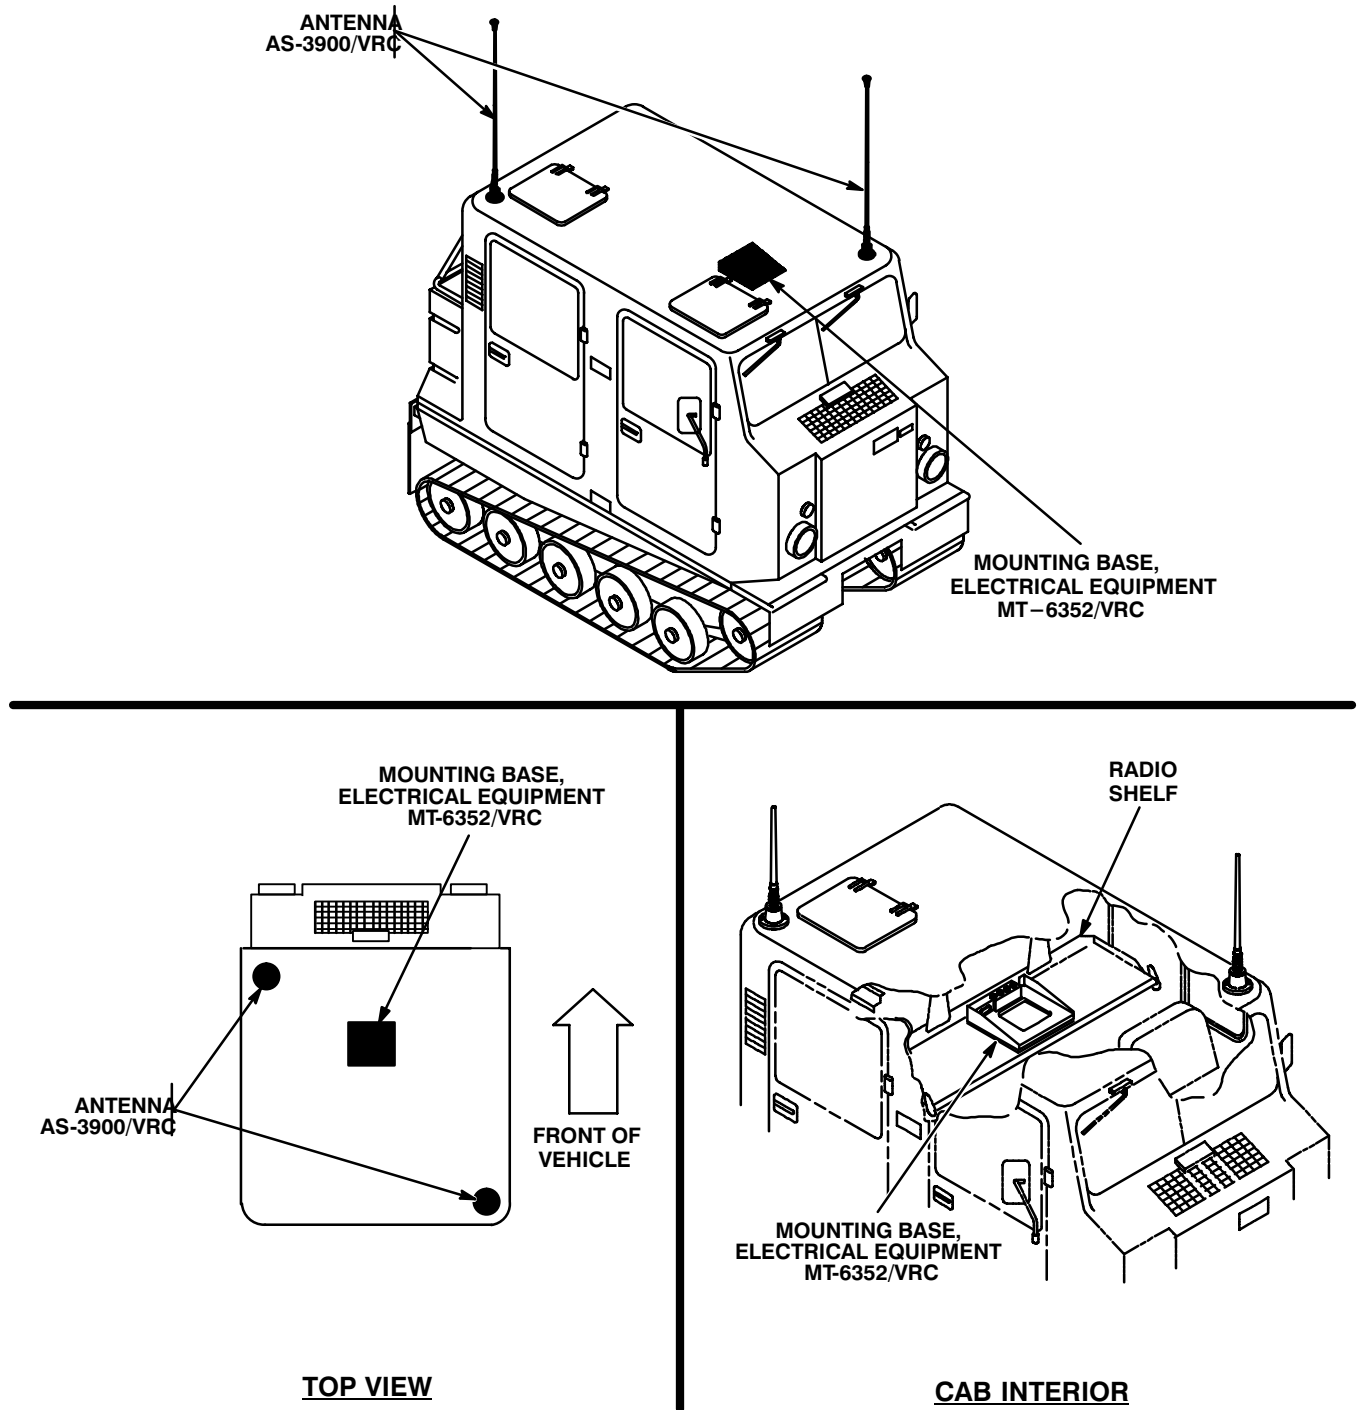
(1). MK and Radio Installation: MK Equipment Locations
